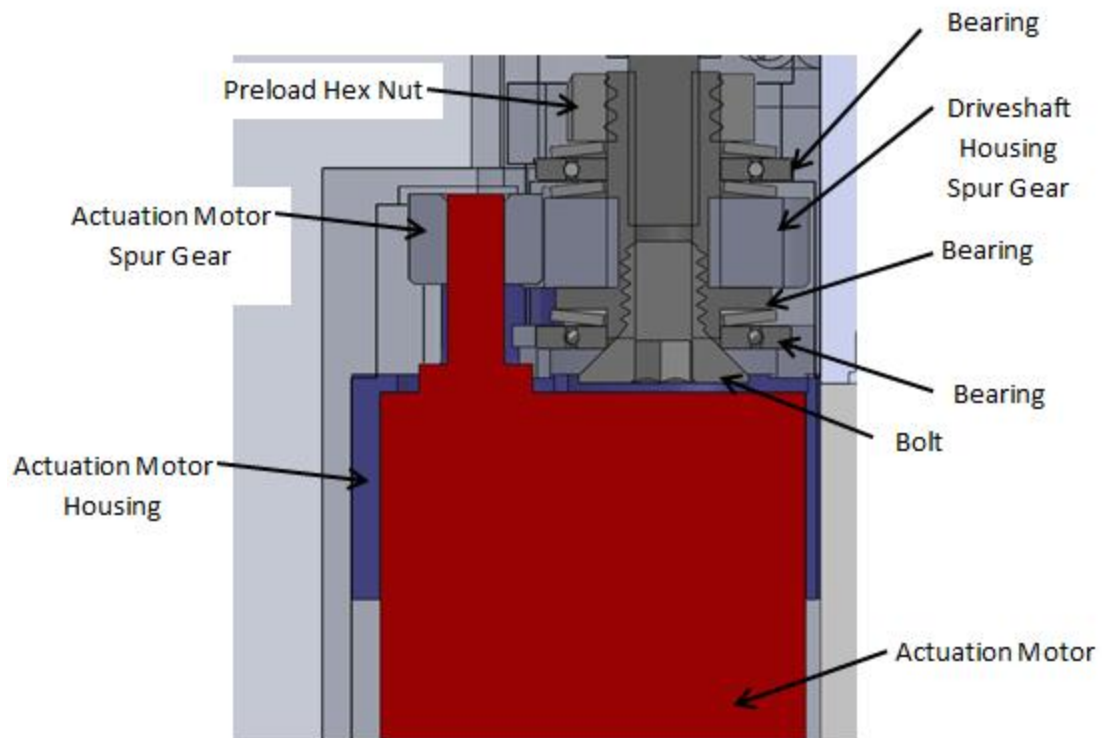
Cross sectional view of grasper driveshaft actuation mechanism
